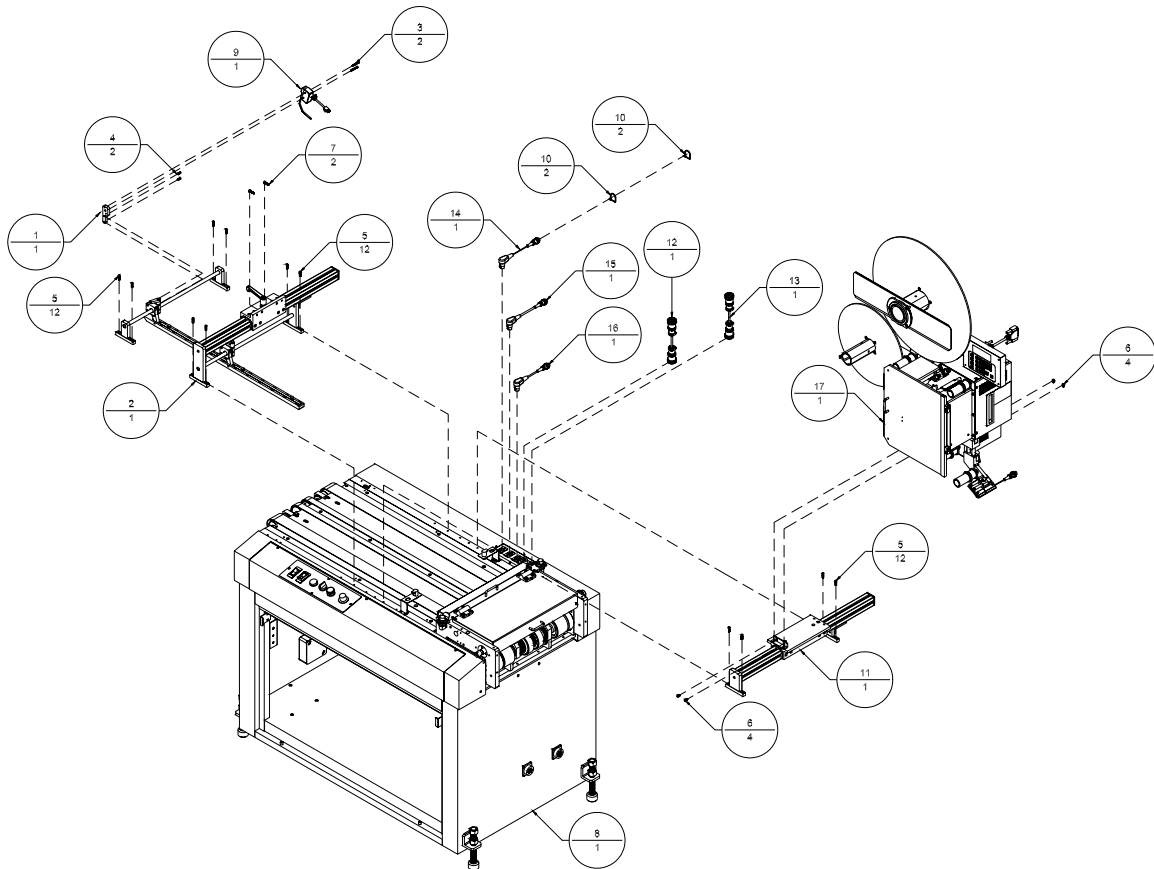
BK730 Tabber Final Assembly (BK730F)
